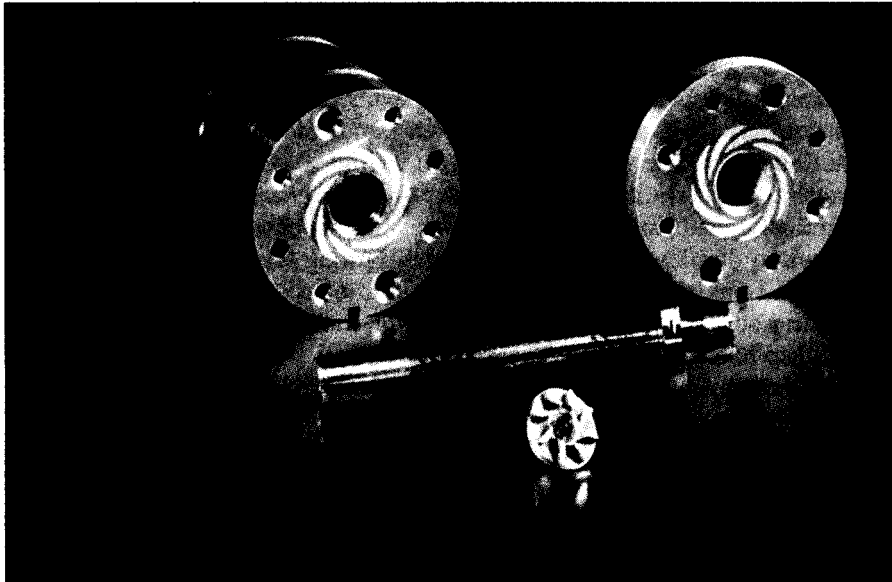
Air bearings. Courtesy Society of Tribologists and Lubrication Engineers.
